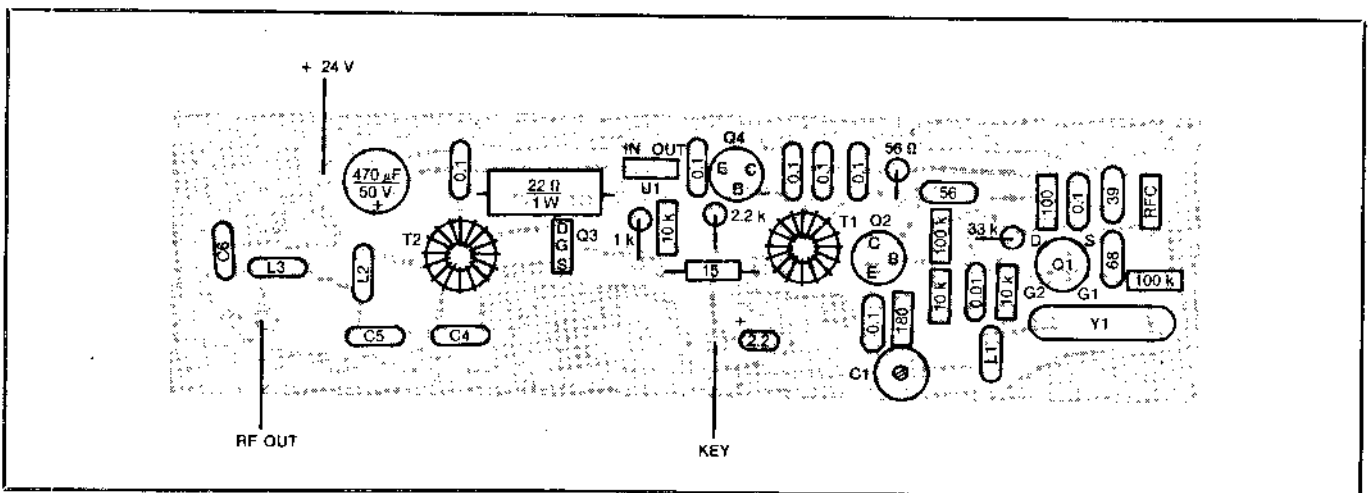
Parts-placement guide for the 30-meter exciter, as viewed from the component side of the pc board. See Hints and Kinks, this issue, for the etching-board pattern.
